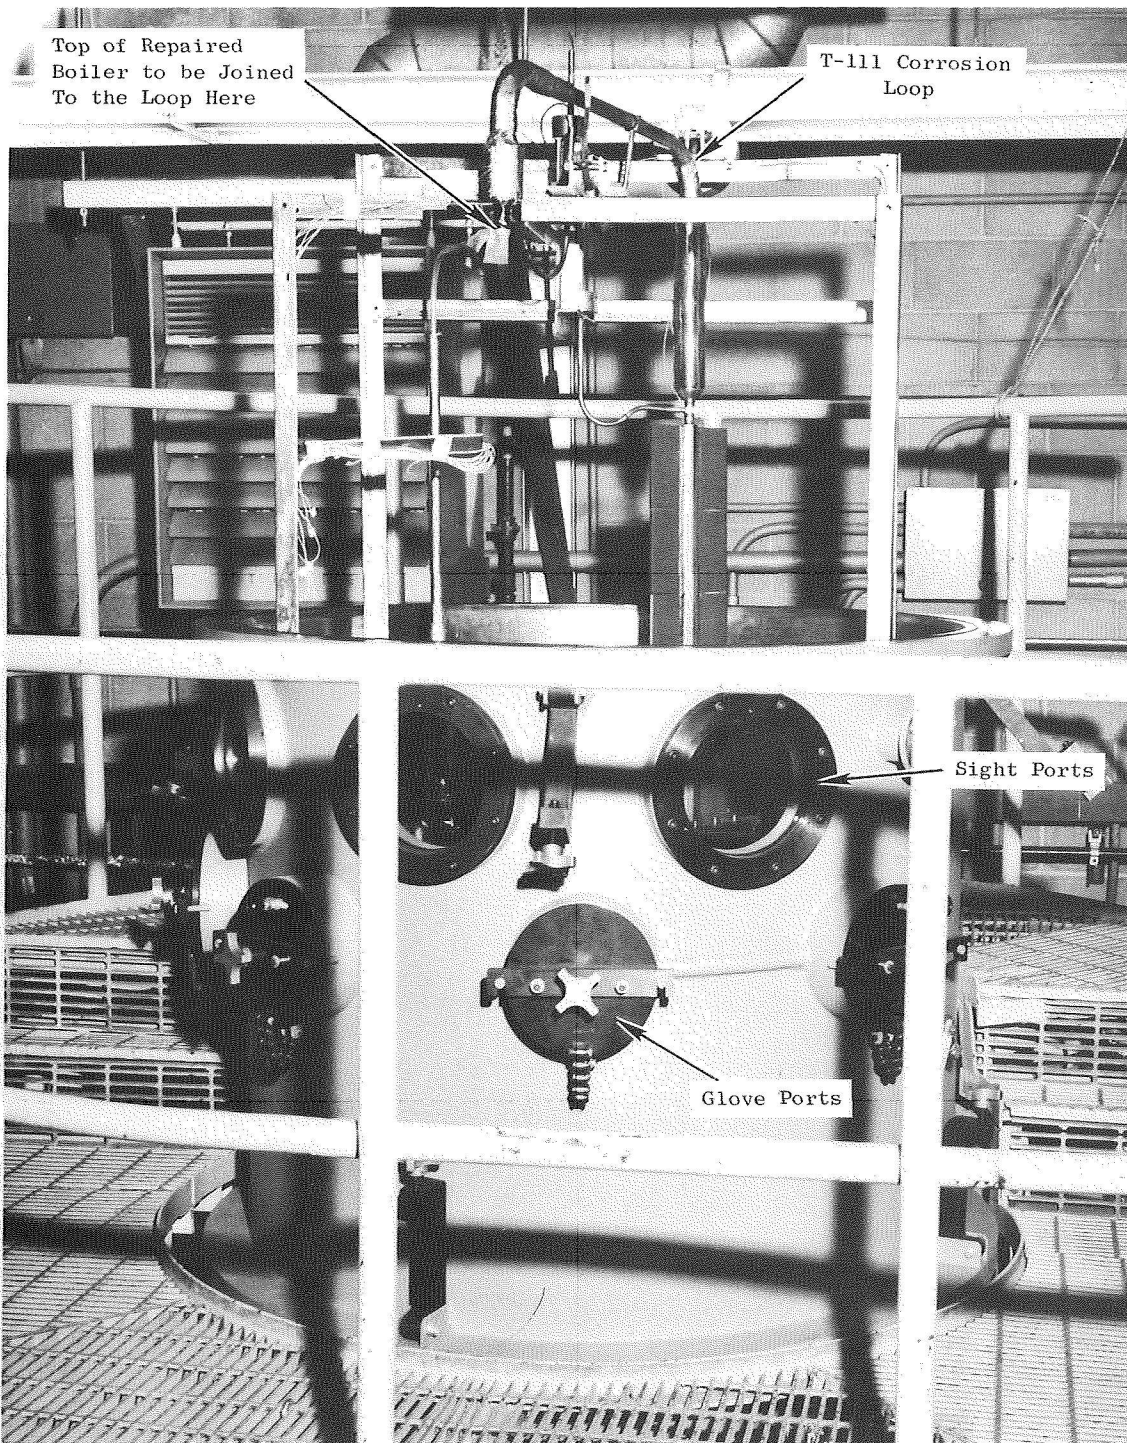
Installation of the Welding Chamber Around the T-111 Corrosion Loop. Lower Spool Piece in Position. (C68090429)
